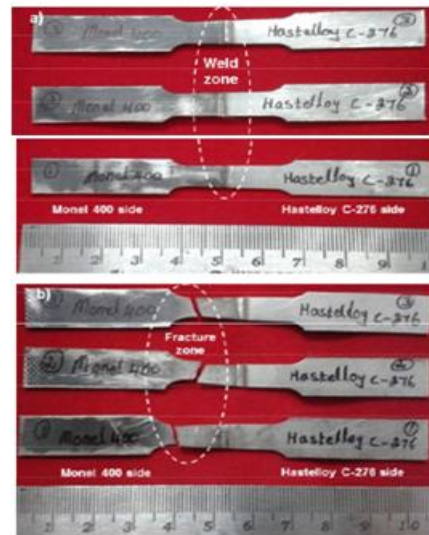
Tensile test samples a) before fracture b) after fracture.
